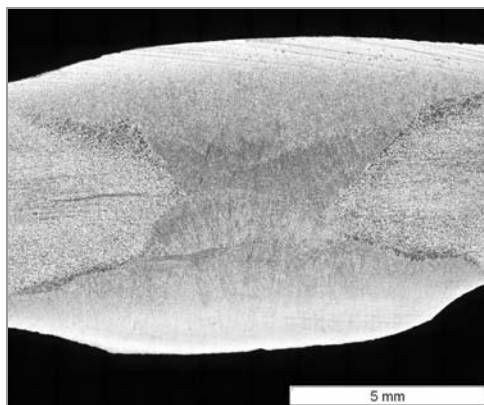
Double-sided headwave weld of duplex steel made by welding with coated electrode Avesta 2205 AC/DC (magnification 1:1)
